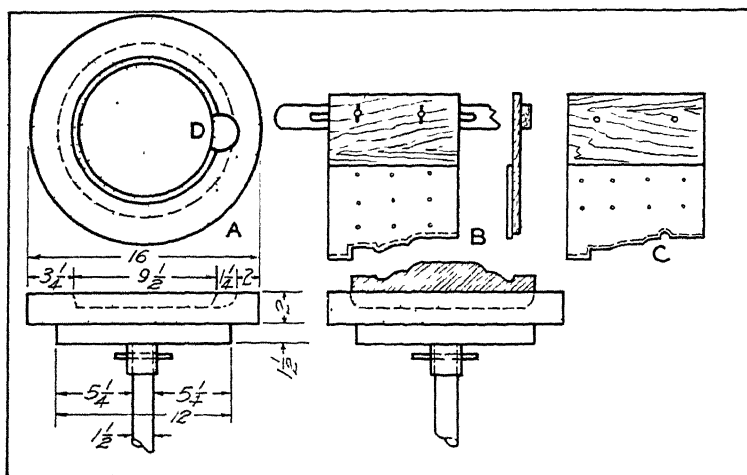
A wheel head and templates for platemarking. At *A* is the wheel head or jigger ready to hold the plate mold. A template is cut as shown at *B*, and set on the jolley over the wheel head *A*. Plaster then is piled on the wheel head as soon as it is sized, and a form is scraped the exact shape of the inside of the plate. The hatched section is a cross section of this form. The template at *C* then is attached in place of the one at *B*, after which a plate can be made bottom up as shown. A joggle to keep the form from slipping is shown at *D*.
